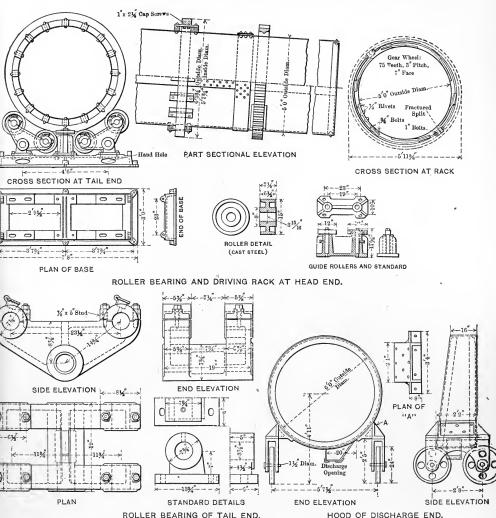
Details of 60-foot rotary kiln. (Engineering News.)
